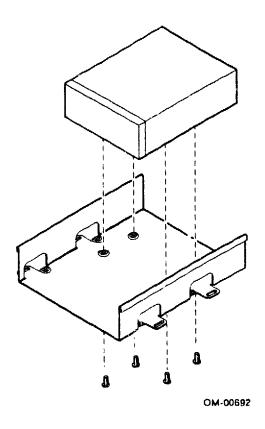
Attaching a 3.5-Inch SCSI Device to a 5.25-Inch Mounting Tray
